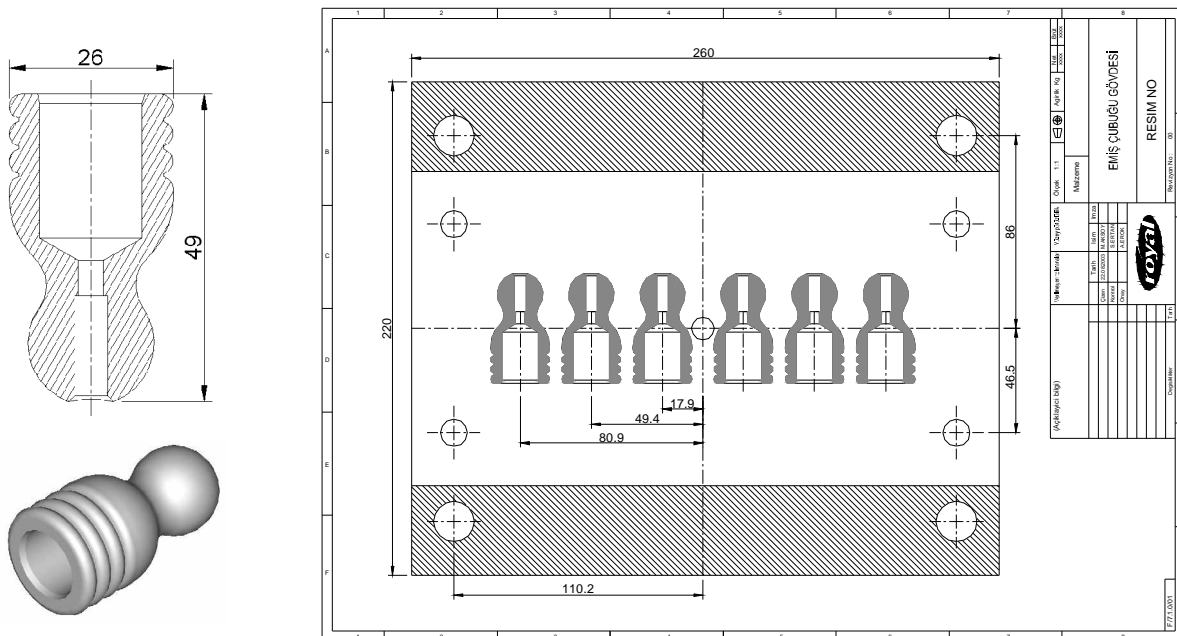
The technical drawings of part (top and bottom left) and mould (right)
